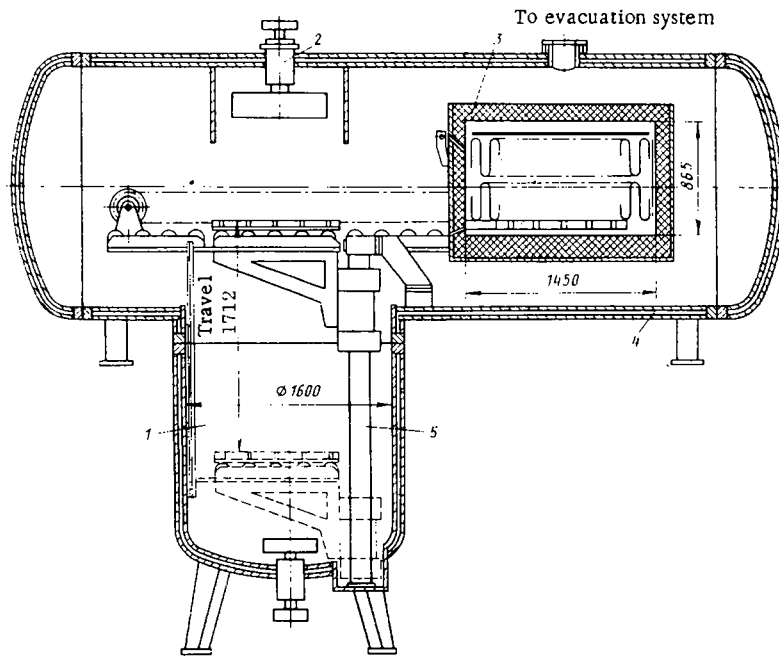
1SNV-5.10.5/11.5F electric vacuum chamber furnace. 1) Quenching tank; 2) fan; 3) heating chamber; 4) frame; 5) mechanism for transferring the batch.
